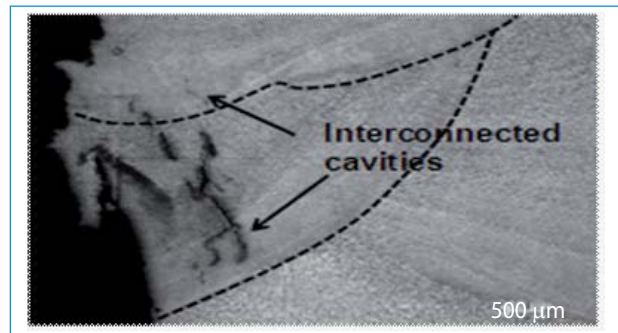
Micrograph showing interconnected cavities in weld joint fabricated with 2.5 mm electrode
